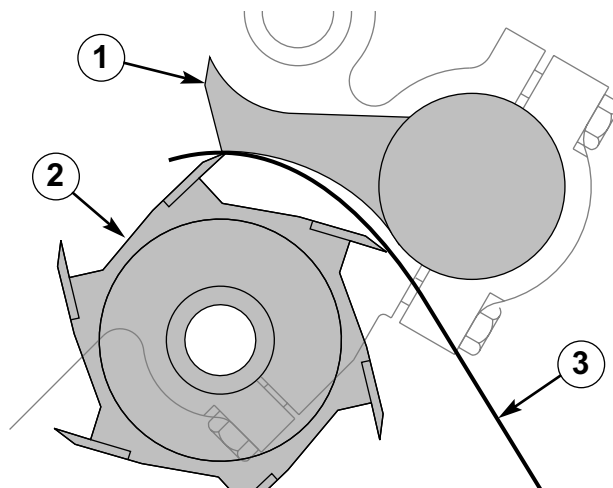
Setting clearance between crosscut knife spindle and shear plate using feeler gauge. (1) Shear Plate, (2) Crosscut Knife Spindle, (3) Feeler Gauge.
